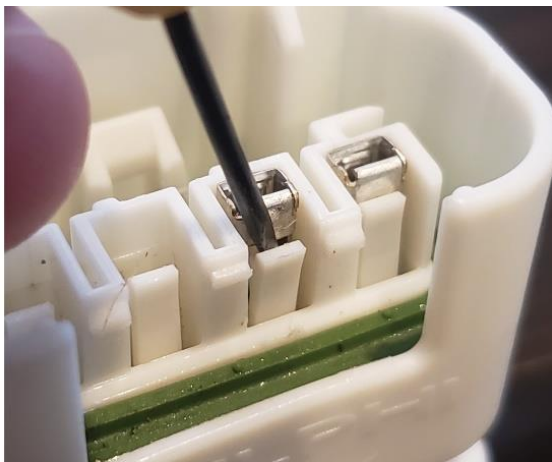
Gently pry the locking tab back to release the Pump+ terminal from the plug body. The wire and terminal will slide out the opposite side of the plug. Pump negative terminal shown for clarity.
